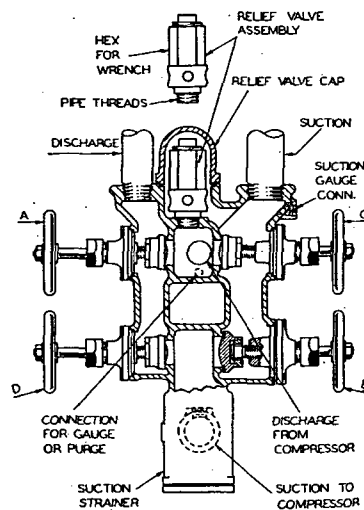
Manifold and Bypass Valves for Unloading Compressor
